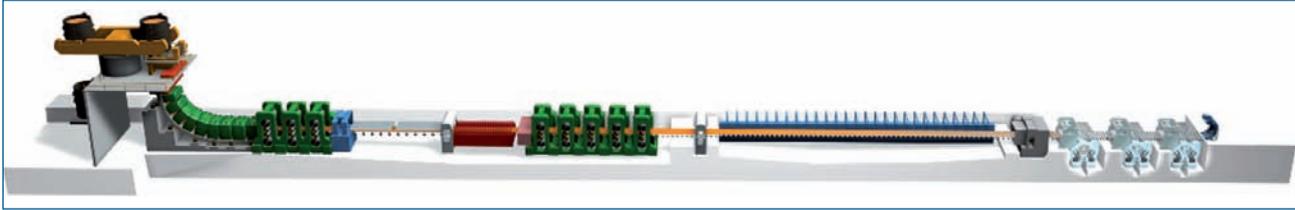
Lay-out of the Arvedi ESP process (from the continuous casting machine to coiling).
